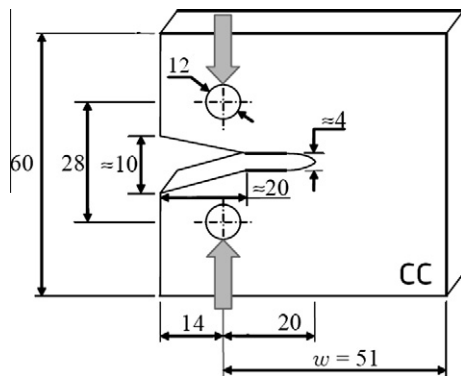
Geometry of compact compression test specimen (after [14], dimensions in mm).
